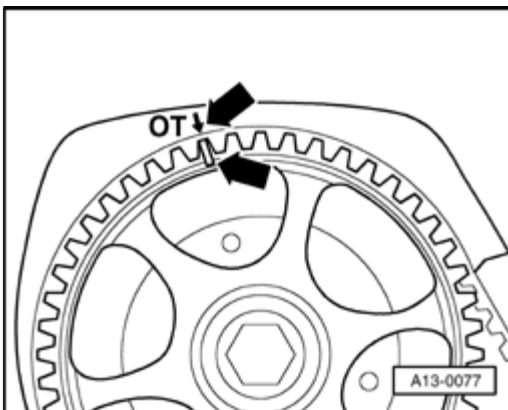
Aligning Mark On Camshaft With Mark On Toothed Belt Cover
